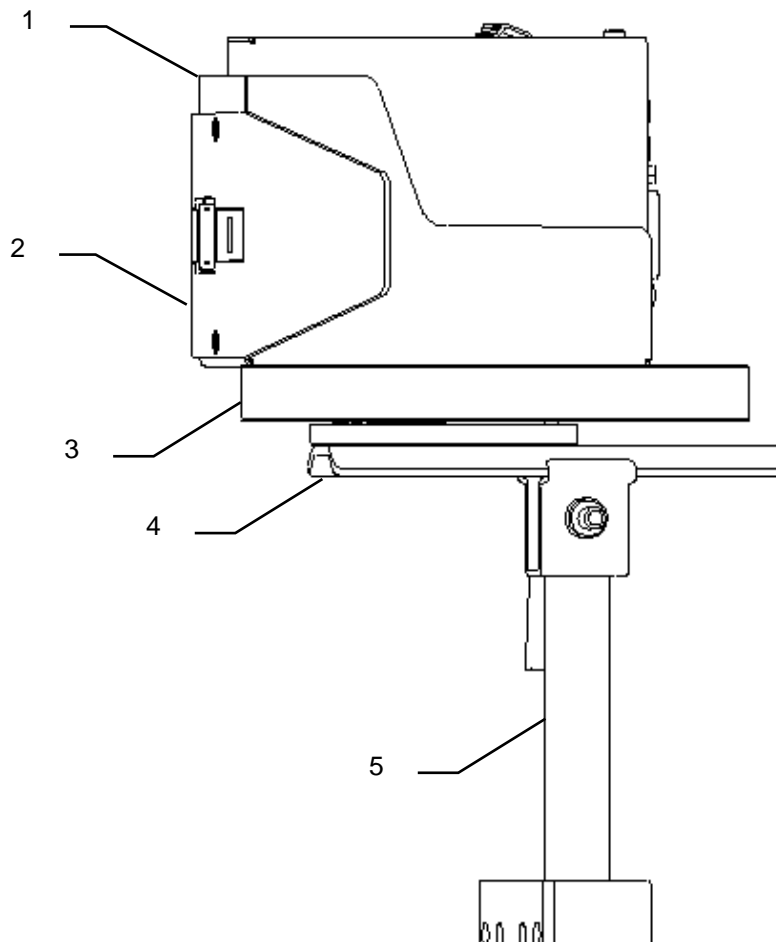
X1JET HP with Flexbracket and universal mounting bracket
